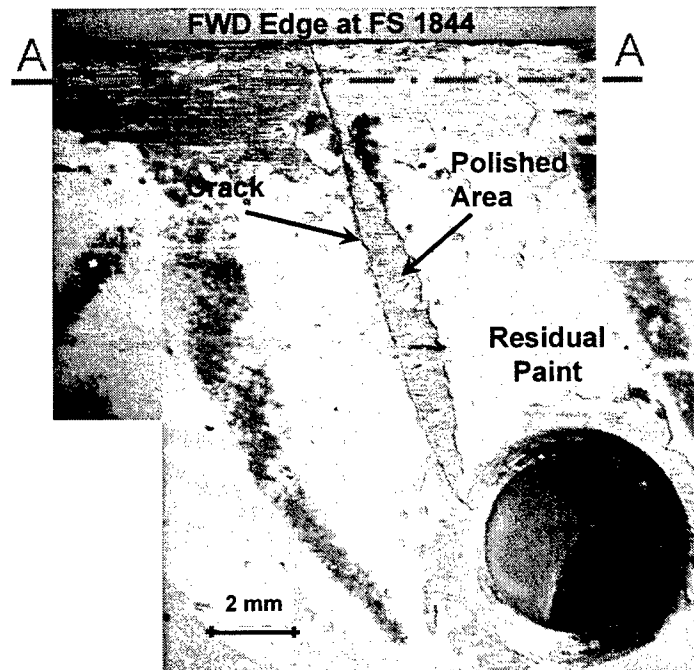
Finding 29 with red line indicating section made to study the crack cross-section.
